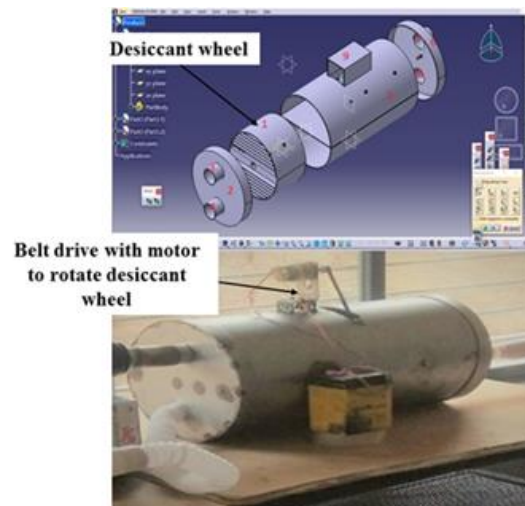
CAD model and photograph of assembly of desiccant wheel chamber
